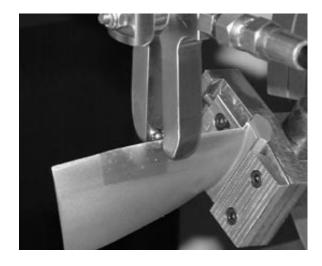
LPB treatment of LE of 17-4PH compressor blade with caliper tool.
